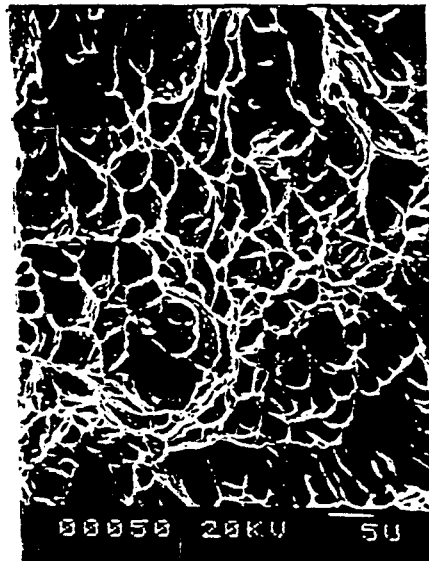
Fracture surface of STS 304 tensile specimen at -70°C
